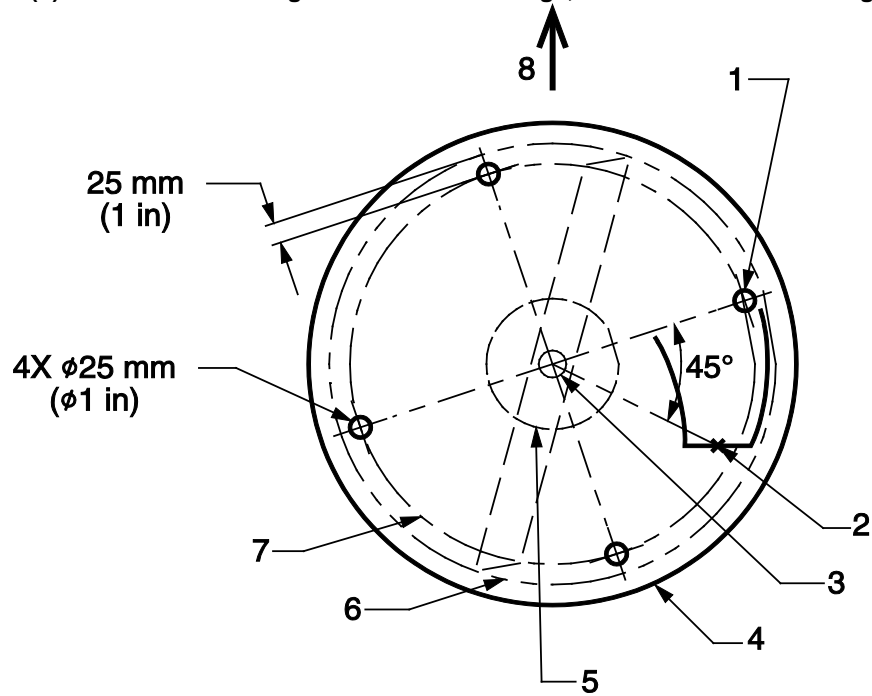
(a) – Plan view of a single-blade front discharge, fixture for structural integrity test
